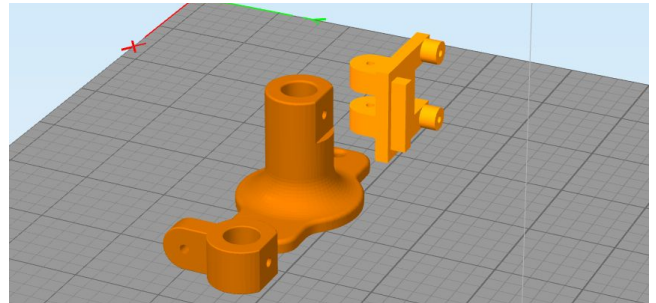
3D printed camera parts that allow the camera to screw into the mount (right), and then that mount connects to the hinge on a dowel (left). And that dowel base (middle). Note: these were printed in black filament for the NXP car.
